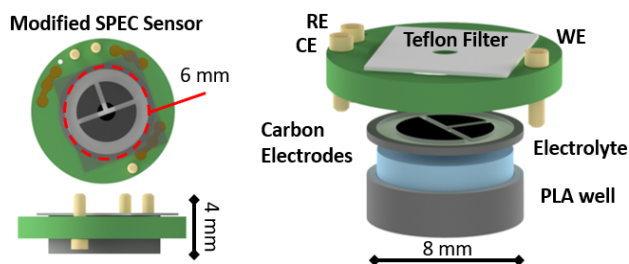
Modified electrochemical H₂S sensor assembly: shown as the top-down, cross-sectional, and exploded view of the H₂S sensor and Sensor-PCB attachment.
